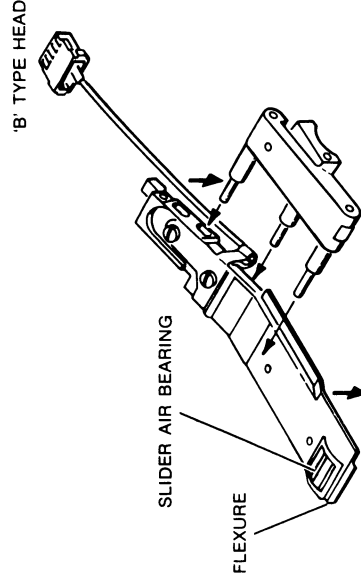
HEAD INSTALLATION TOOL IN 'B' TYPE HEAD
